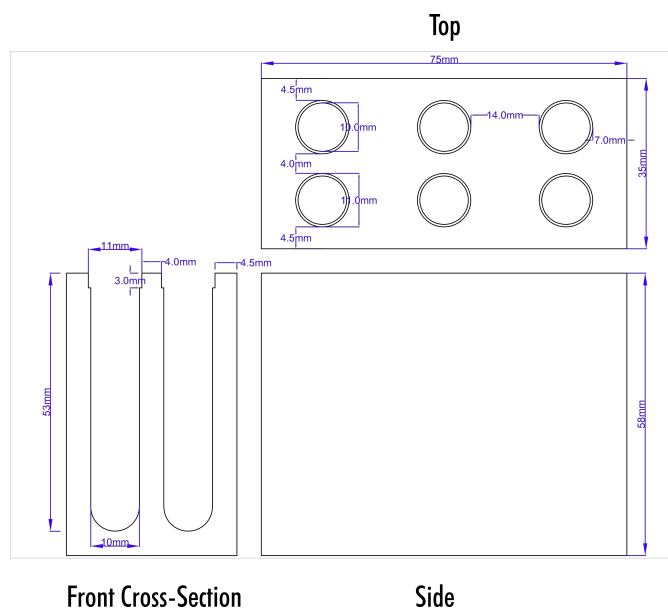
Design for the copper inset of the cooling rig, which can hold up to six samples.
